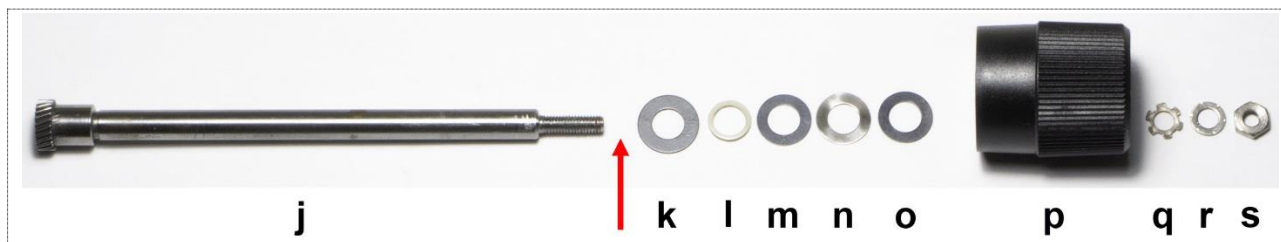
The x-axis control parts after disassembly. From the left to the right:
